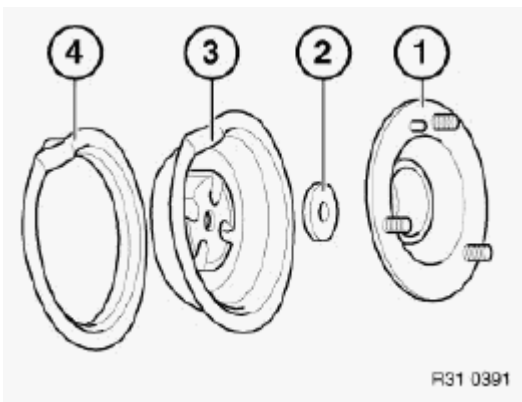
Spring Plate, Support Bearing And Dust Sleeve And Shim
